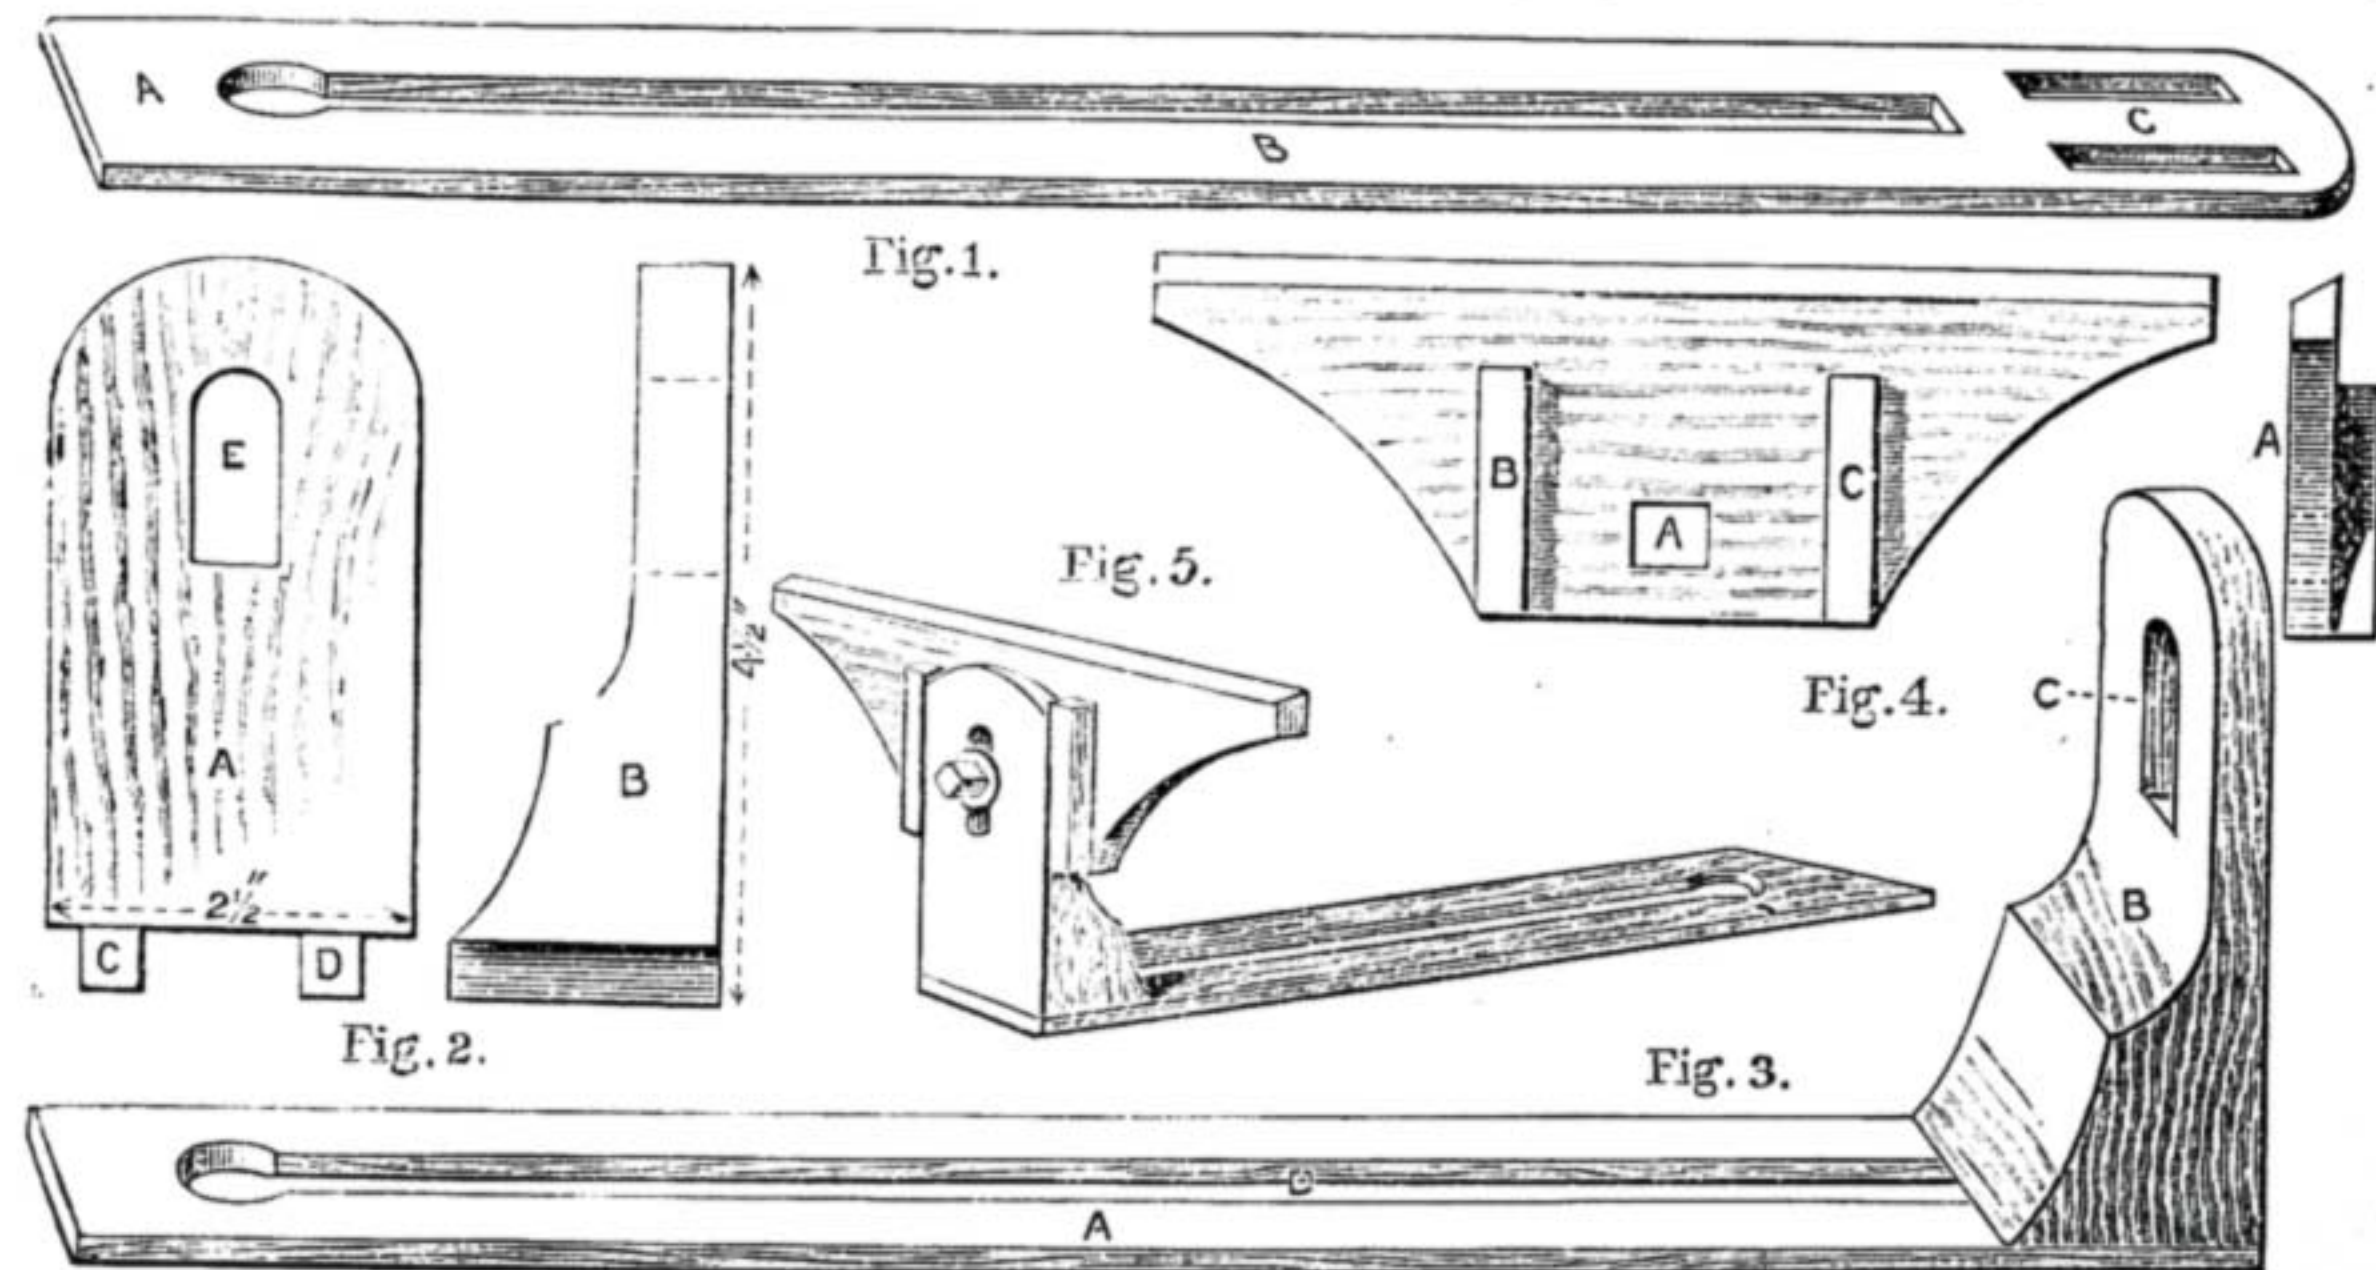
Base or Sole Plate of Lathe. Fig. 2.—Block at End of Sole Plate in Elevation (A) and Side View (B). Fig. 3.—Sole Plate with Block attached. Fig. 4.—T-Piece—A, Side View or Section. Fig. 5.—Perspective View of Rest when completed.
